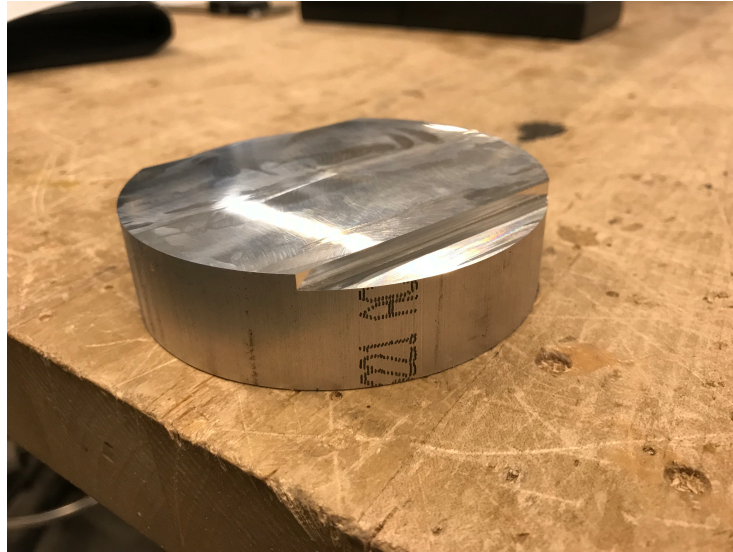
3 3/4 in round 6061-T6 aluminum stock for WASP Version B baseplate. A 1in thick slice was used as the initial stock, both sides were faced, and flats were milled on bottom side to achieve greater clamping force for top side machining operations.
